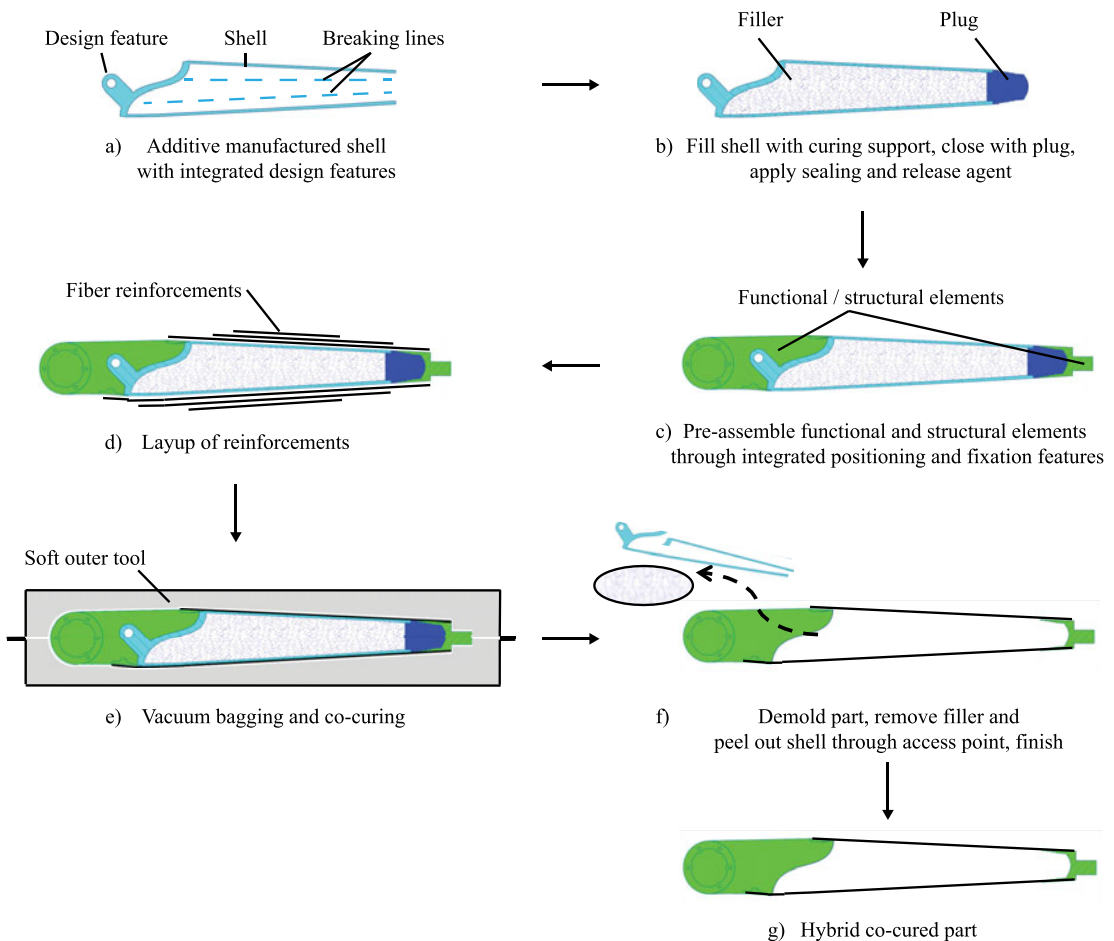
Manufacturing technique for complex-shaped hybrid composites using a functional 3D-printed shell (a) which is filled with a structural curing support (b) and pre-assembled with functional elements (c). Reinforcement fibers are laid on the assembly (d) which bagged and cured (e). After curing, the part is demolded, the filler is removed, and the shell is peeled out (f), resulting in a hybrid composite part (g).
